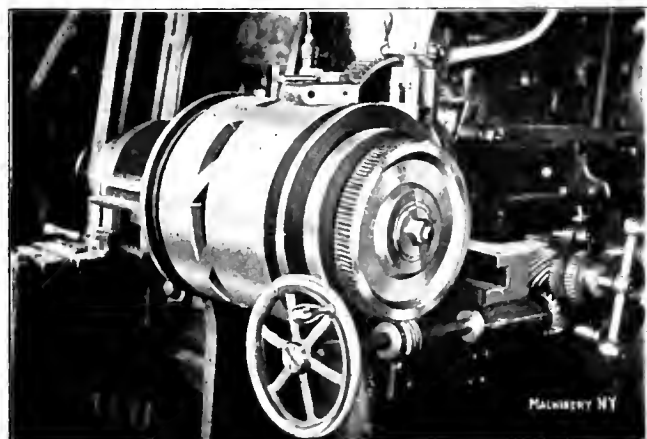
Planing Valve Ports on a Shaper by using a Special Rotary Feed Attachment
